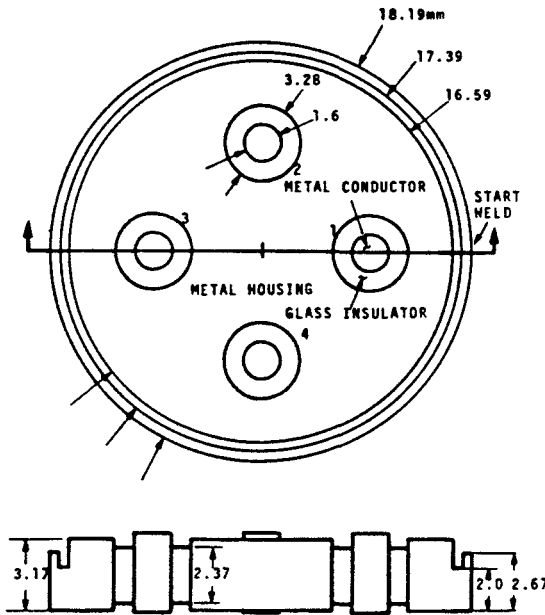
Geometry and dimensions of header. Dimensions are in mm.
